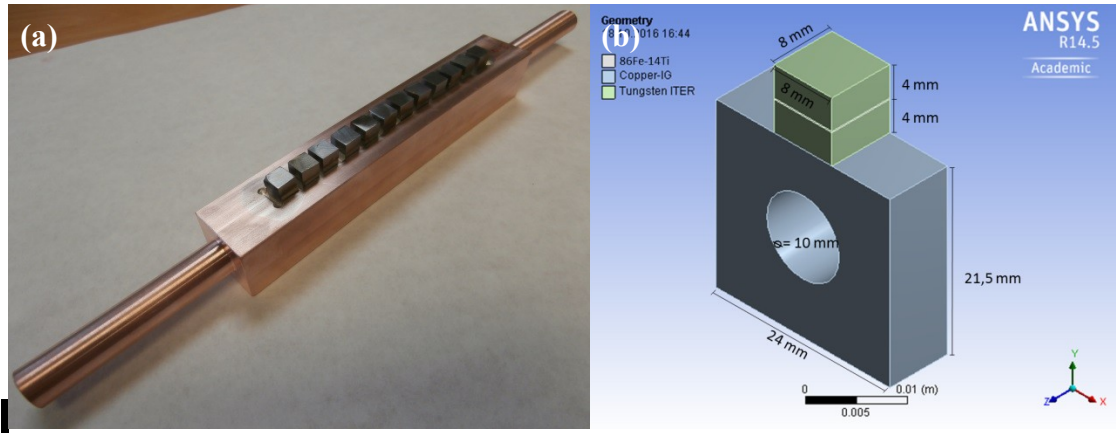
(a) General view of cooling structures with the brazed samples used for the tests. (b) Schematic representation and dimensions of the samples and cooling component used for the tests.
